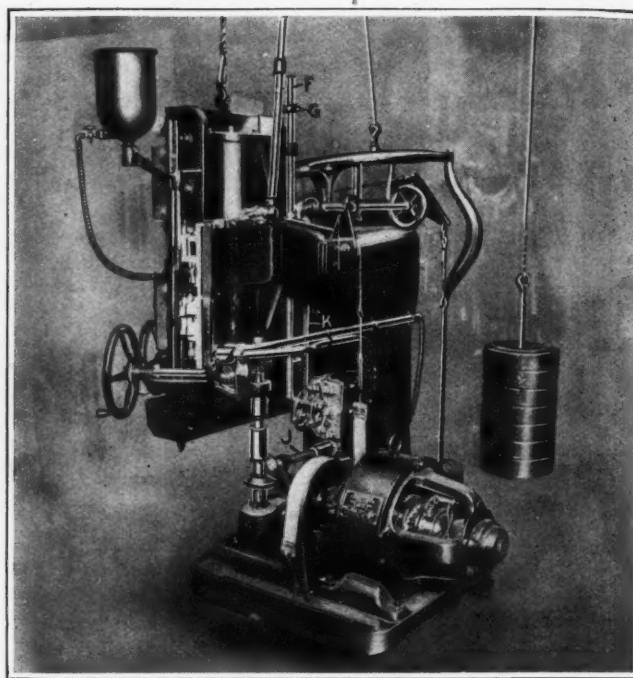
Rear View of the Automatic Profiling Machine, showing Reversing Motor and Drive to Work-table and Feed
